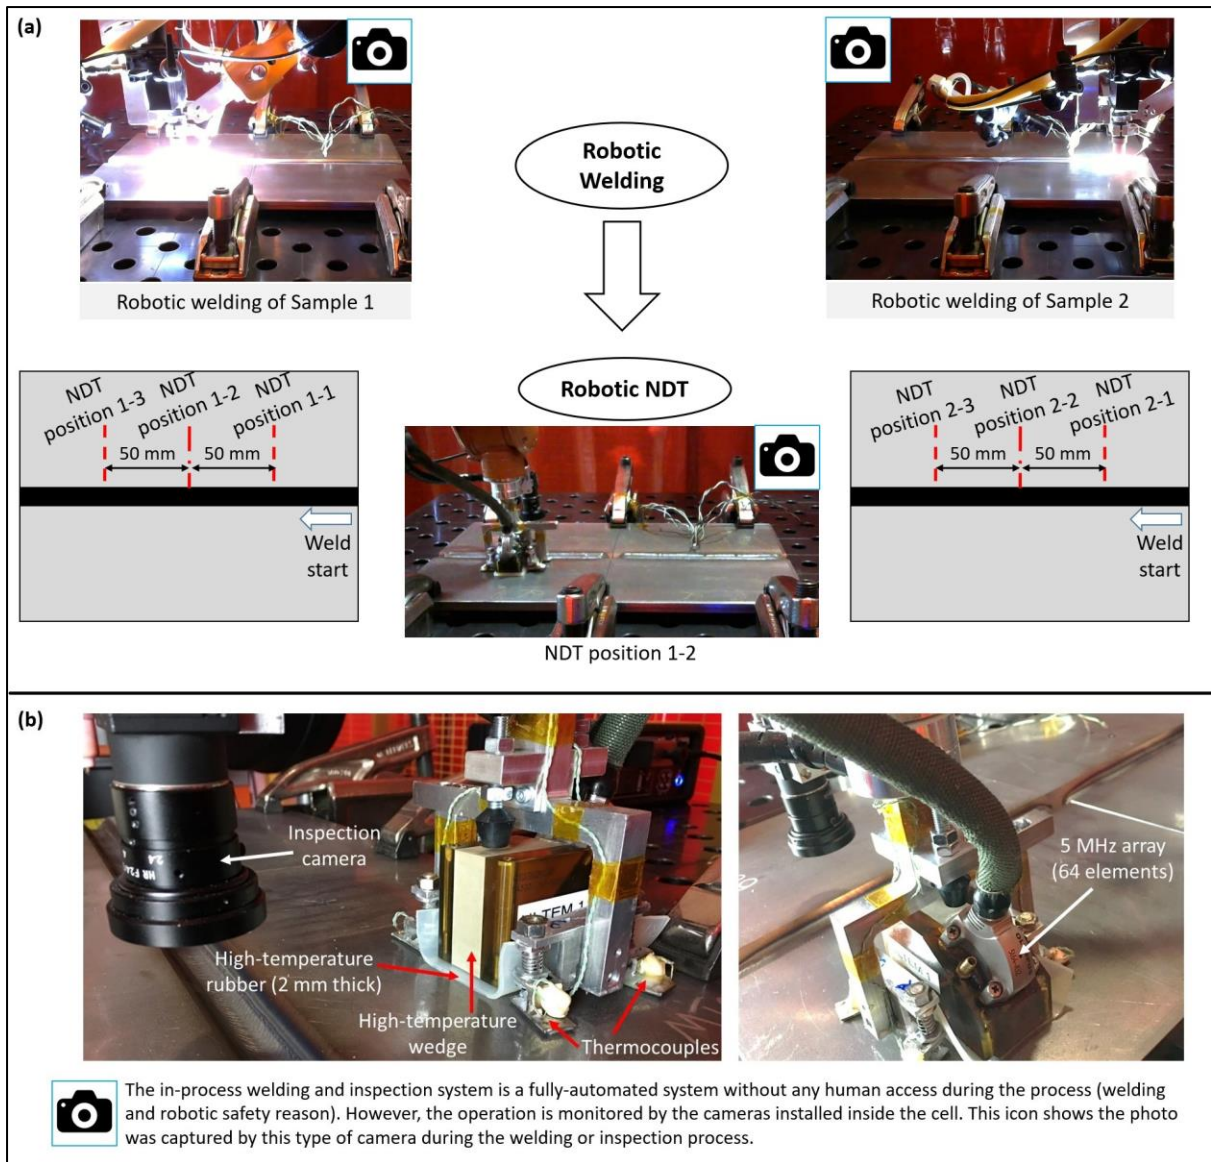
Robotic multi-pass welding and in-process inspection system (a: the whole setup and NDT positions – b: NDT end-effector)
